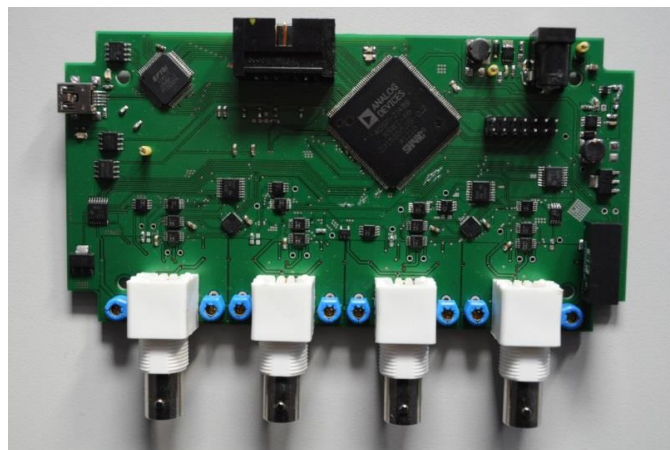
Implemented system. The final PCB has 145 mm length and 75 mm width.
